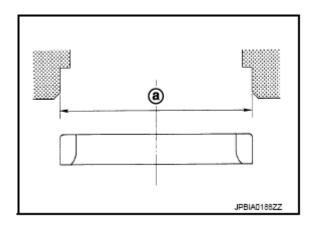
Identifying Cylinder Head Recess Diameter Courtesy of NISSAN NORTH AMERICA, INC.
